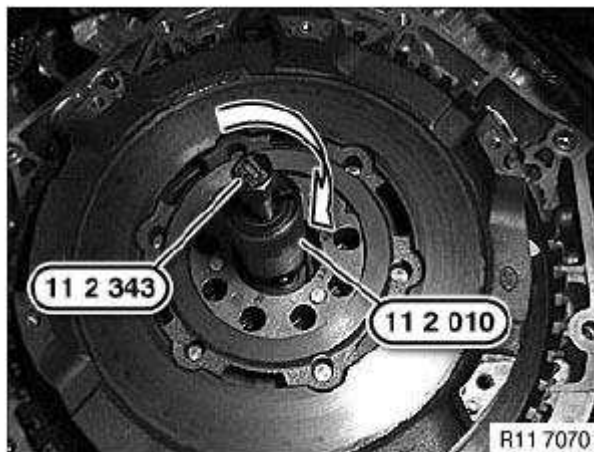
Twisting Out Roller Bearing With Special Tool 11 2 343
